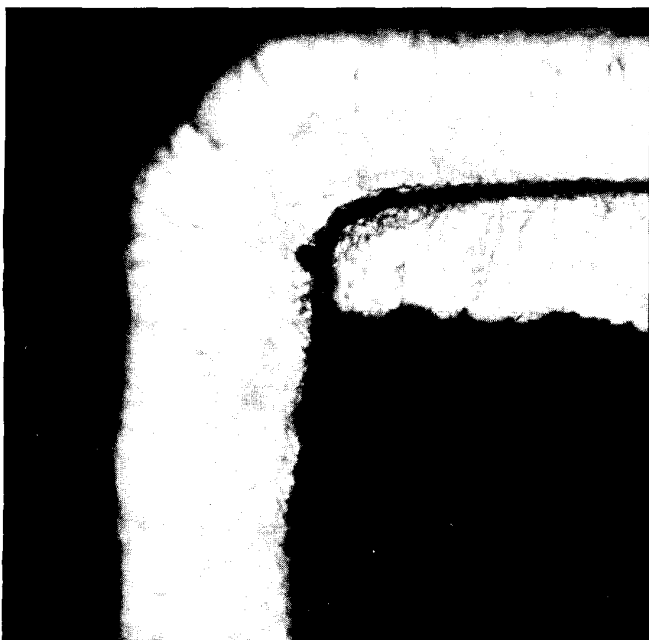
Cross section of the copper deposited in a drilled hole in a printed circuit board.
